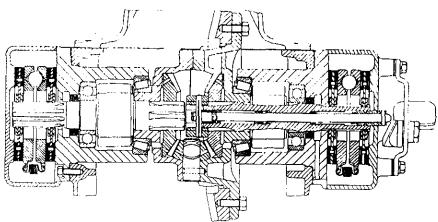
Sectional view of differential, bull pinions and brakes. Note differential lock which operates through hollow right hand bull pinion shaft.
